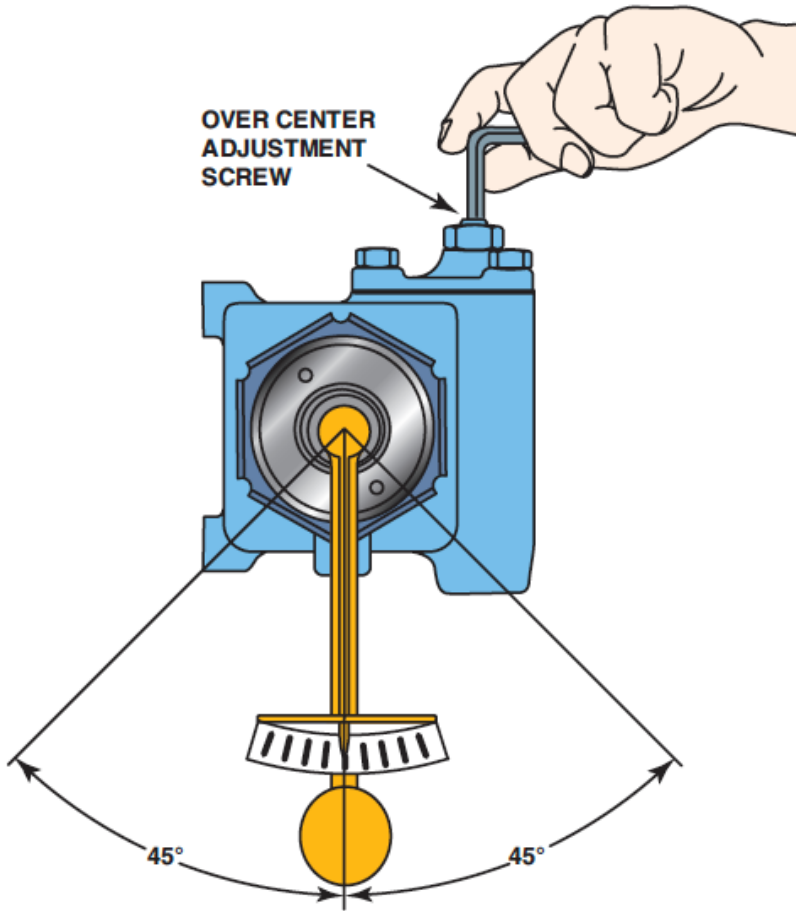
The overcenter adjustment is done while moving the torque wrench back and forth over the straight ahead position.
